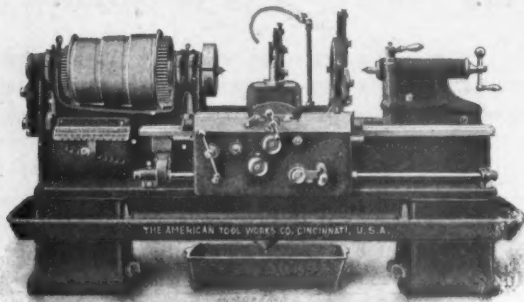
18-IN. HIGH-SPEED MANUFACTURING LATHE.
